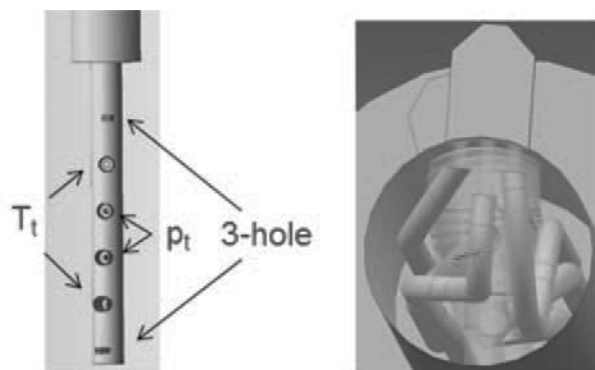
Design of a combined rake for additive manufacturing (left: view of the rake, right: view of the inner structure)
